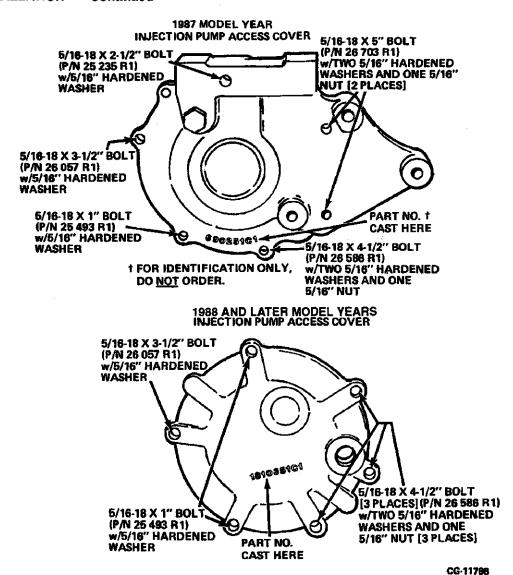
Install Injection Pump Drive Gear Access Cover Using the Correct Hardware
